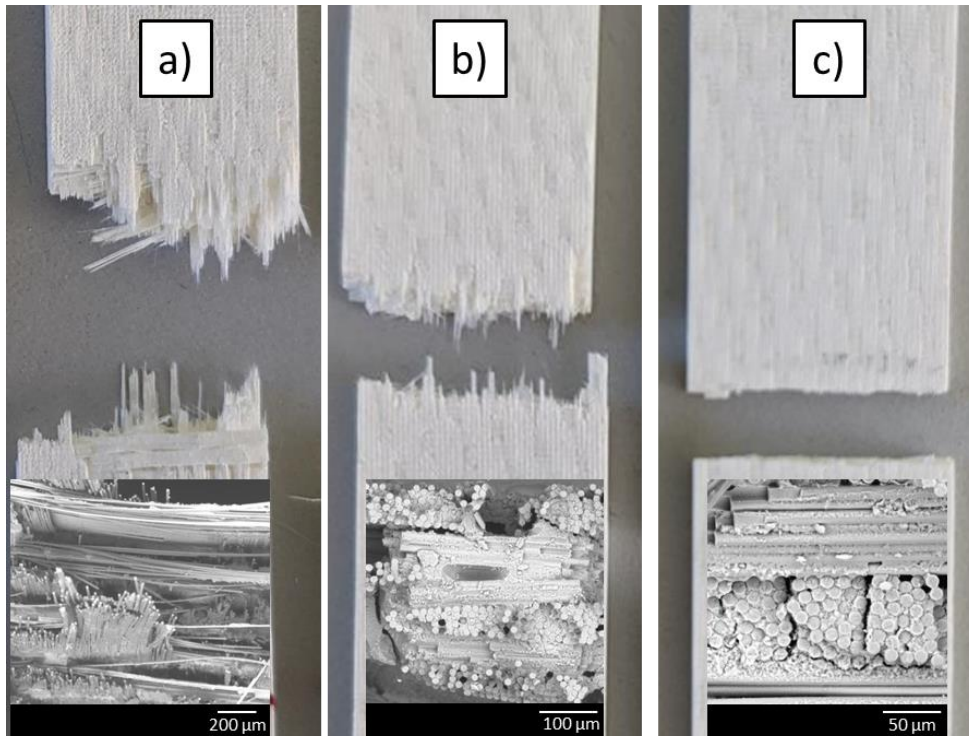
Fracture surfaces of a N610/alumina composite after a tensile test below 1000 °C (a), at 1200 °C (b) and at 1300 °C (c).
